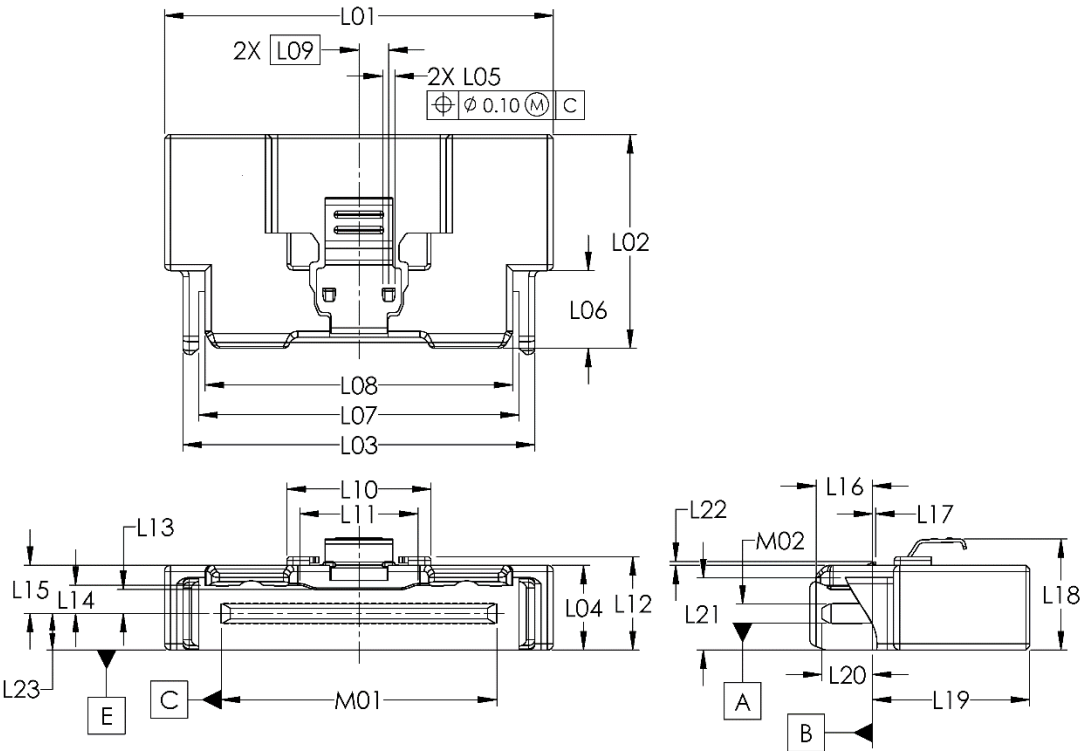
Straight Plug with Side Anti-skew Flanges for 74 Contacts
